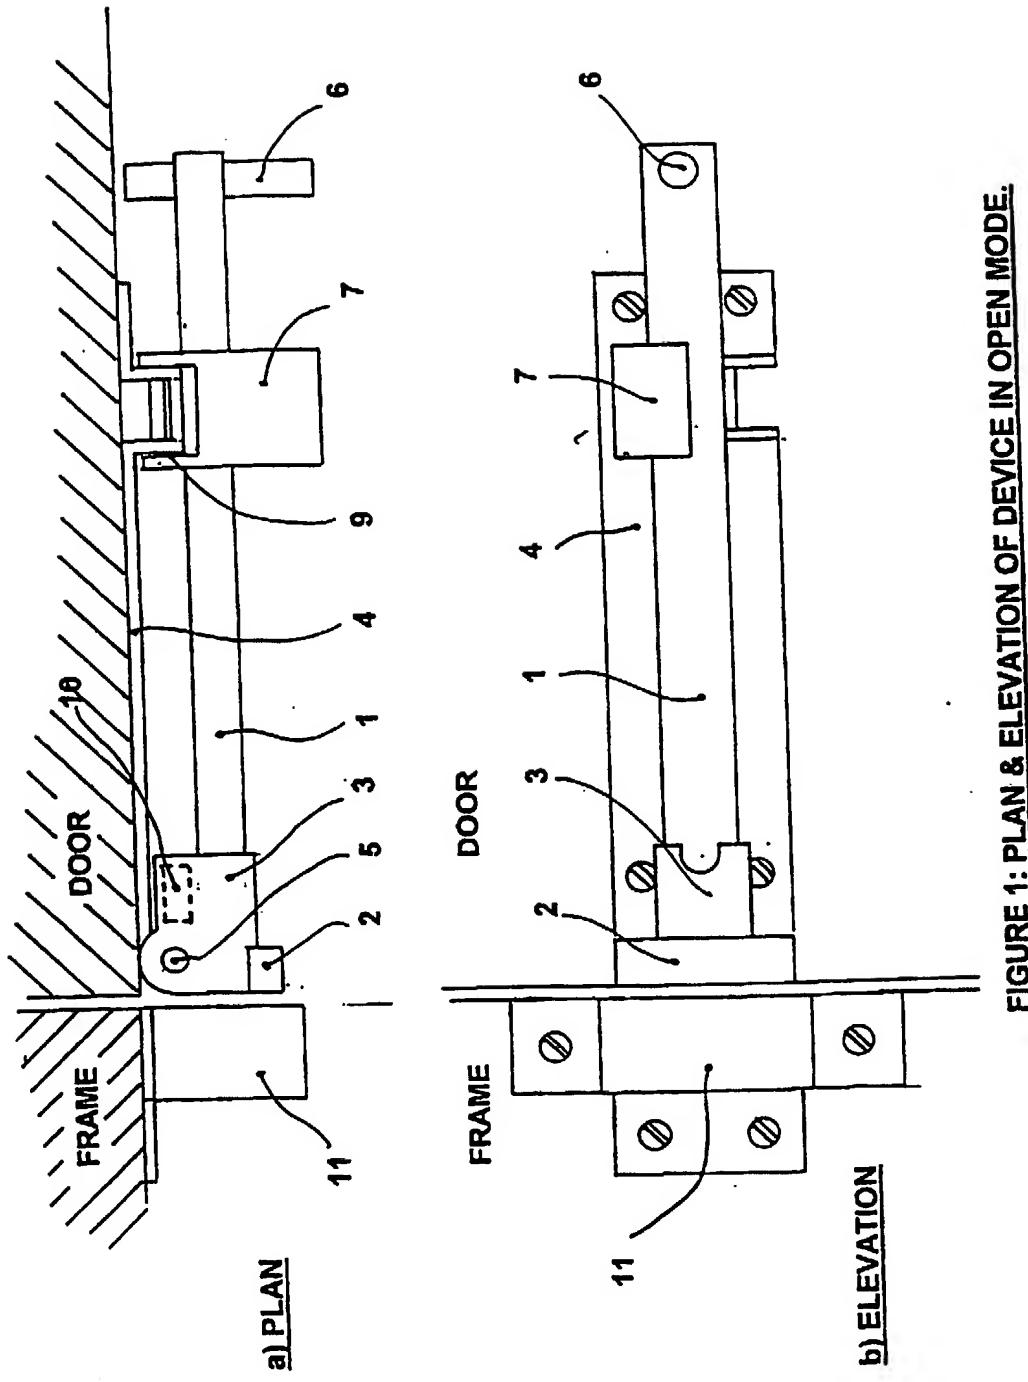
PLAN & ELEVATION OF DEVICE IN OPEN MODE.
